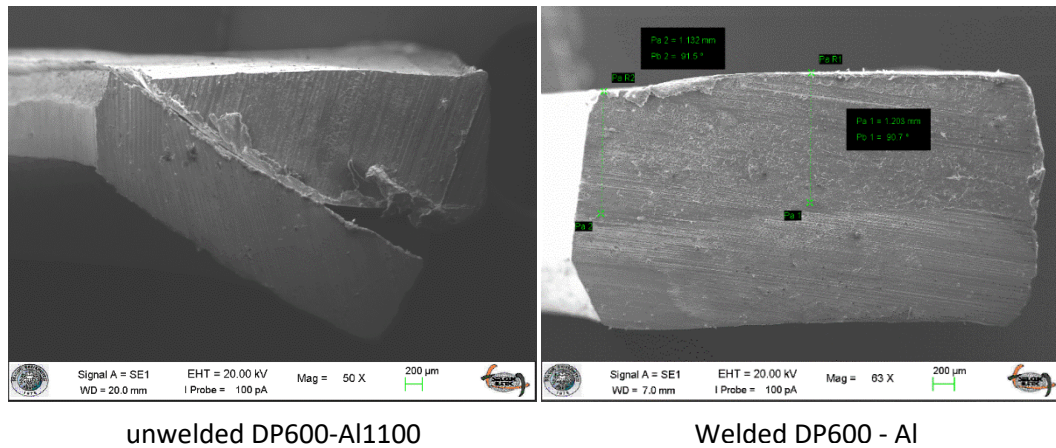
Cutting sheet materials, both welded and unwelded.
